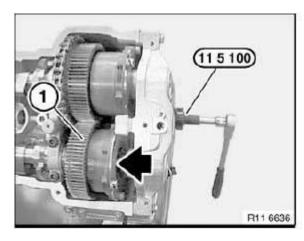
Identifying Special Tool 11 5 100 Courtesy of BMW OF NORTH AMERICA, INC.
